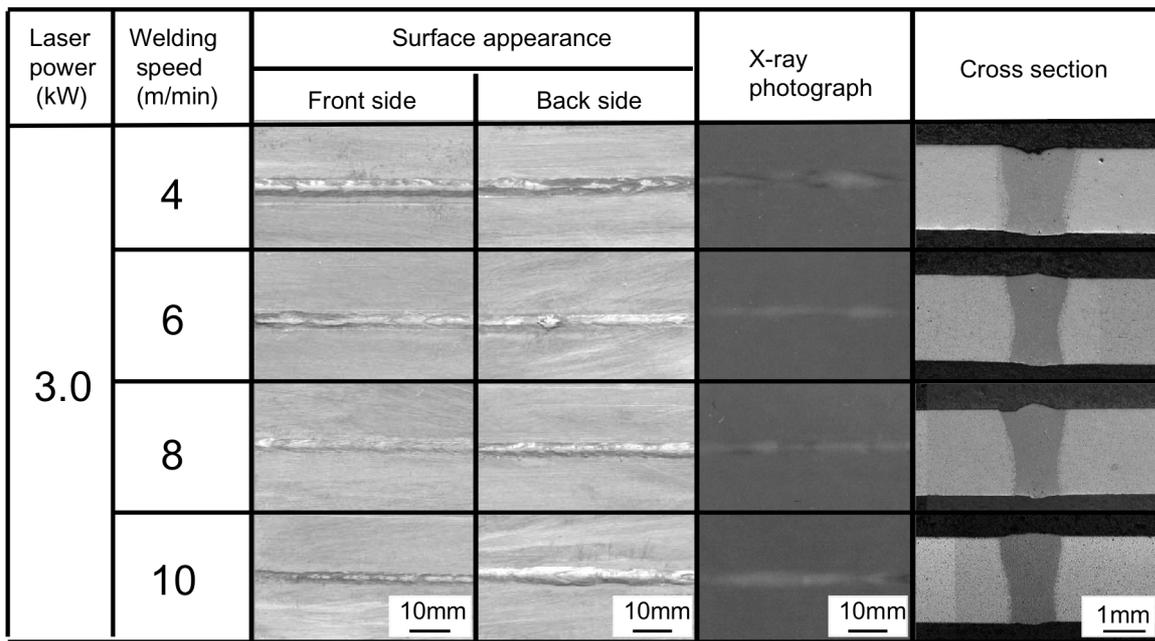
Fiber laser weld appearances, X- ray radiographs and cross-sections of AMC602 for different welding speeds at a constant laser power.
